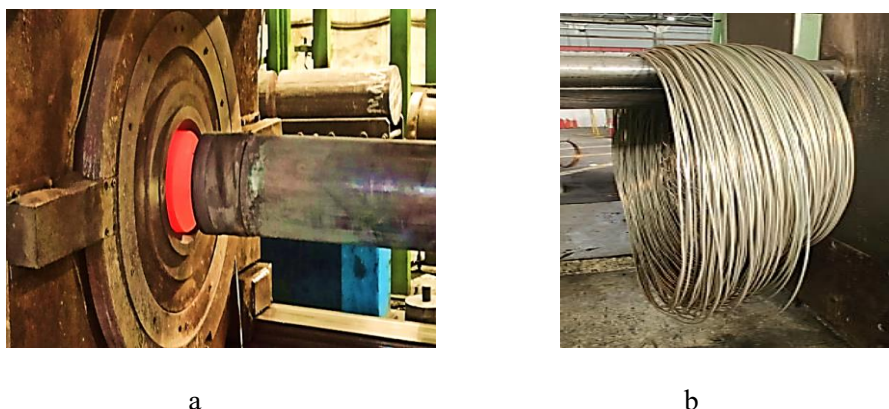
Ingot and tool assembly during extrusion (a), finished product coil (b)
